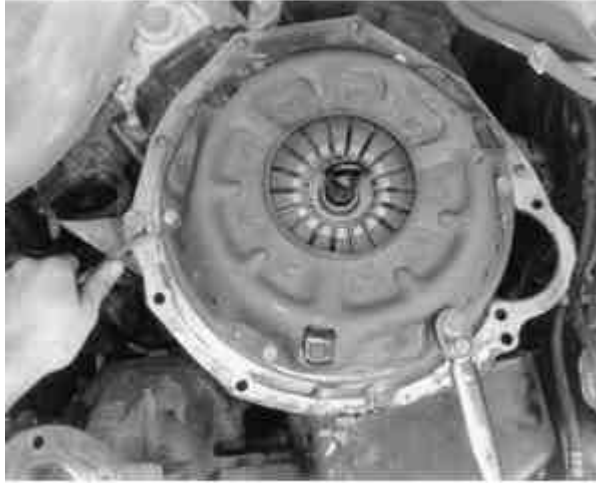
View of the transmission removed — note the clutch release bearing in position
